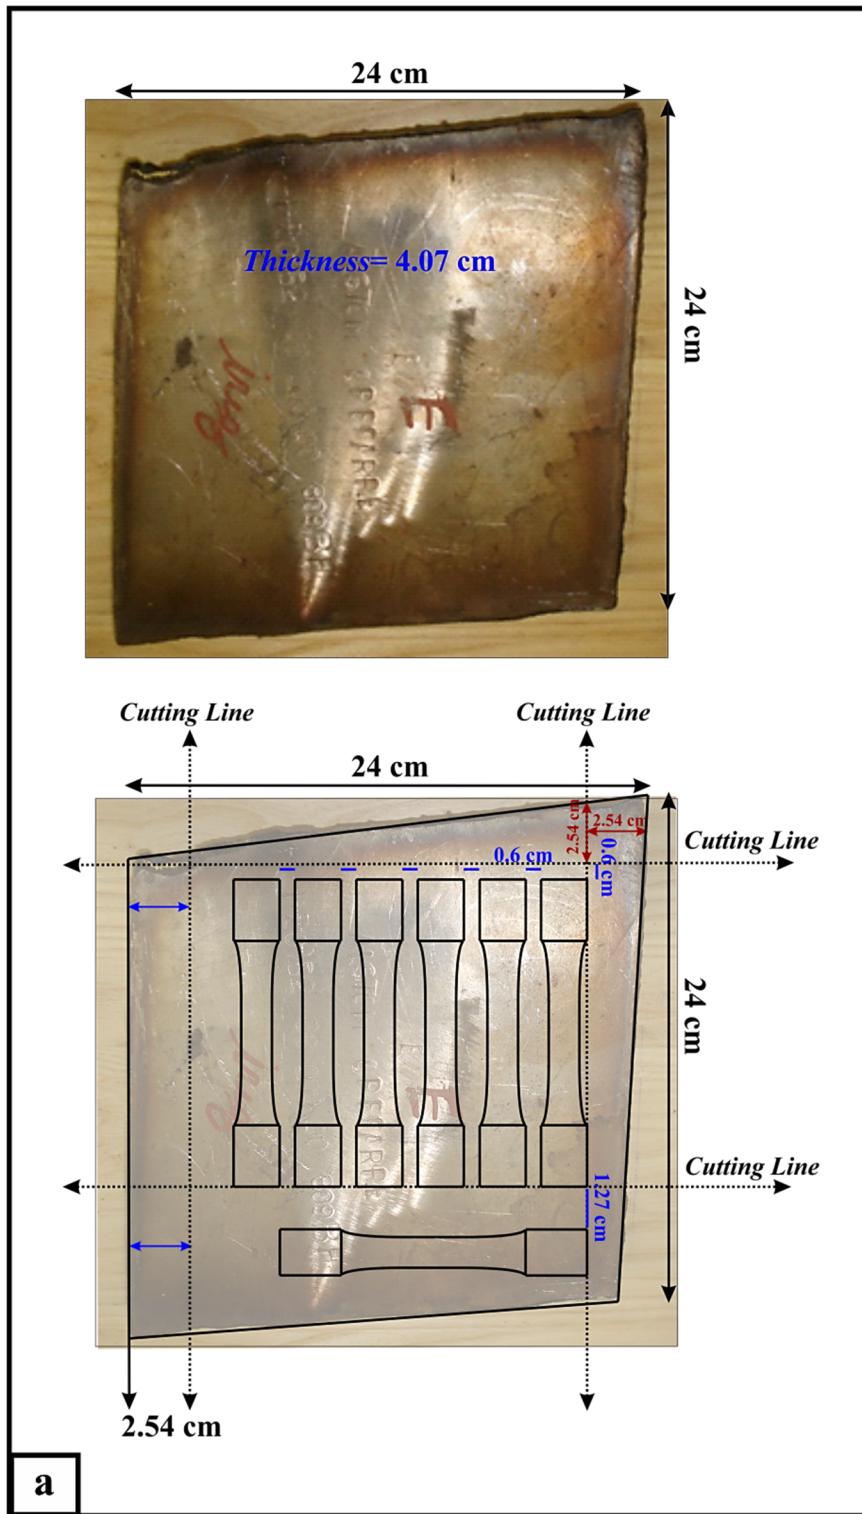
Cutting scheme representing the distribution of the fatigue samples over the first cast block providing seven samples
